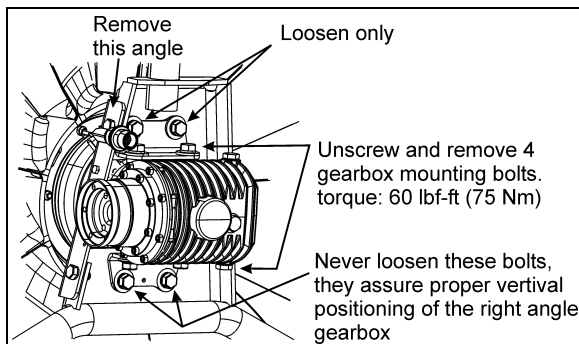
RIGHT ANGLE GEARBOX MOUNTING 05126
